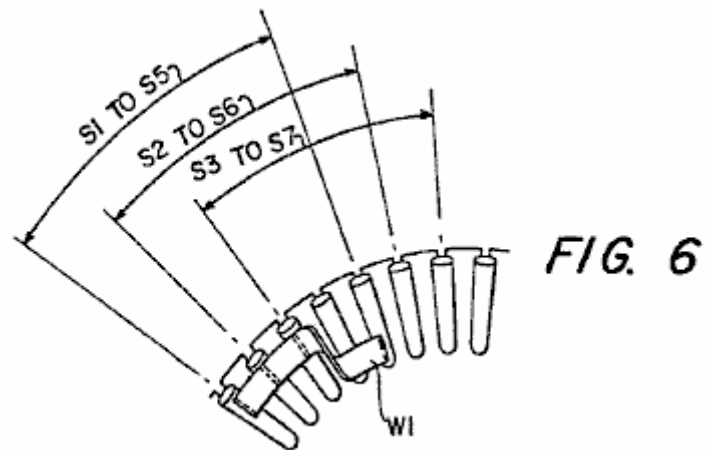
and Fig.7 show details of the winding pattern of the motor of Fig.3.
